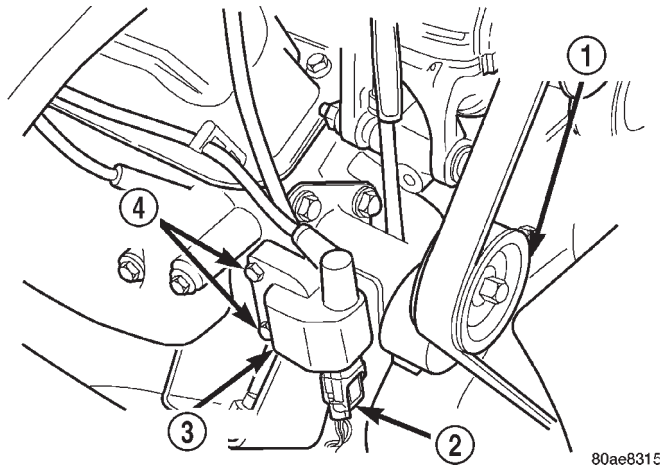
Ignition Coil—3.9L V-6 or 5.2/5.9L V-8 Engines
